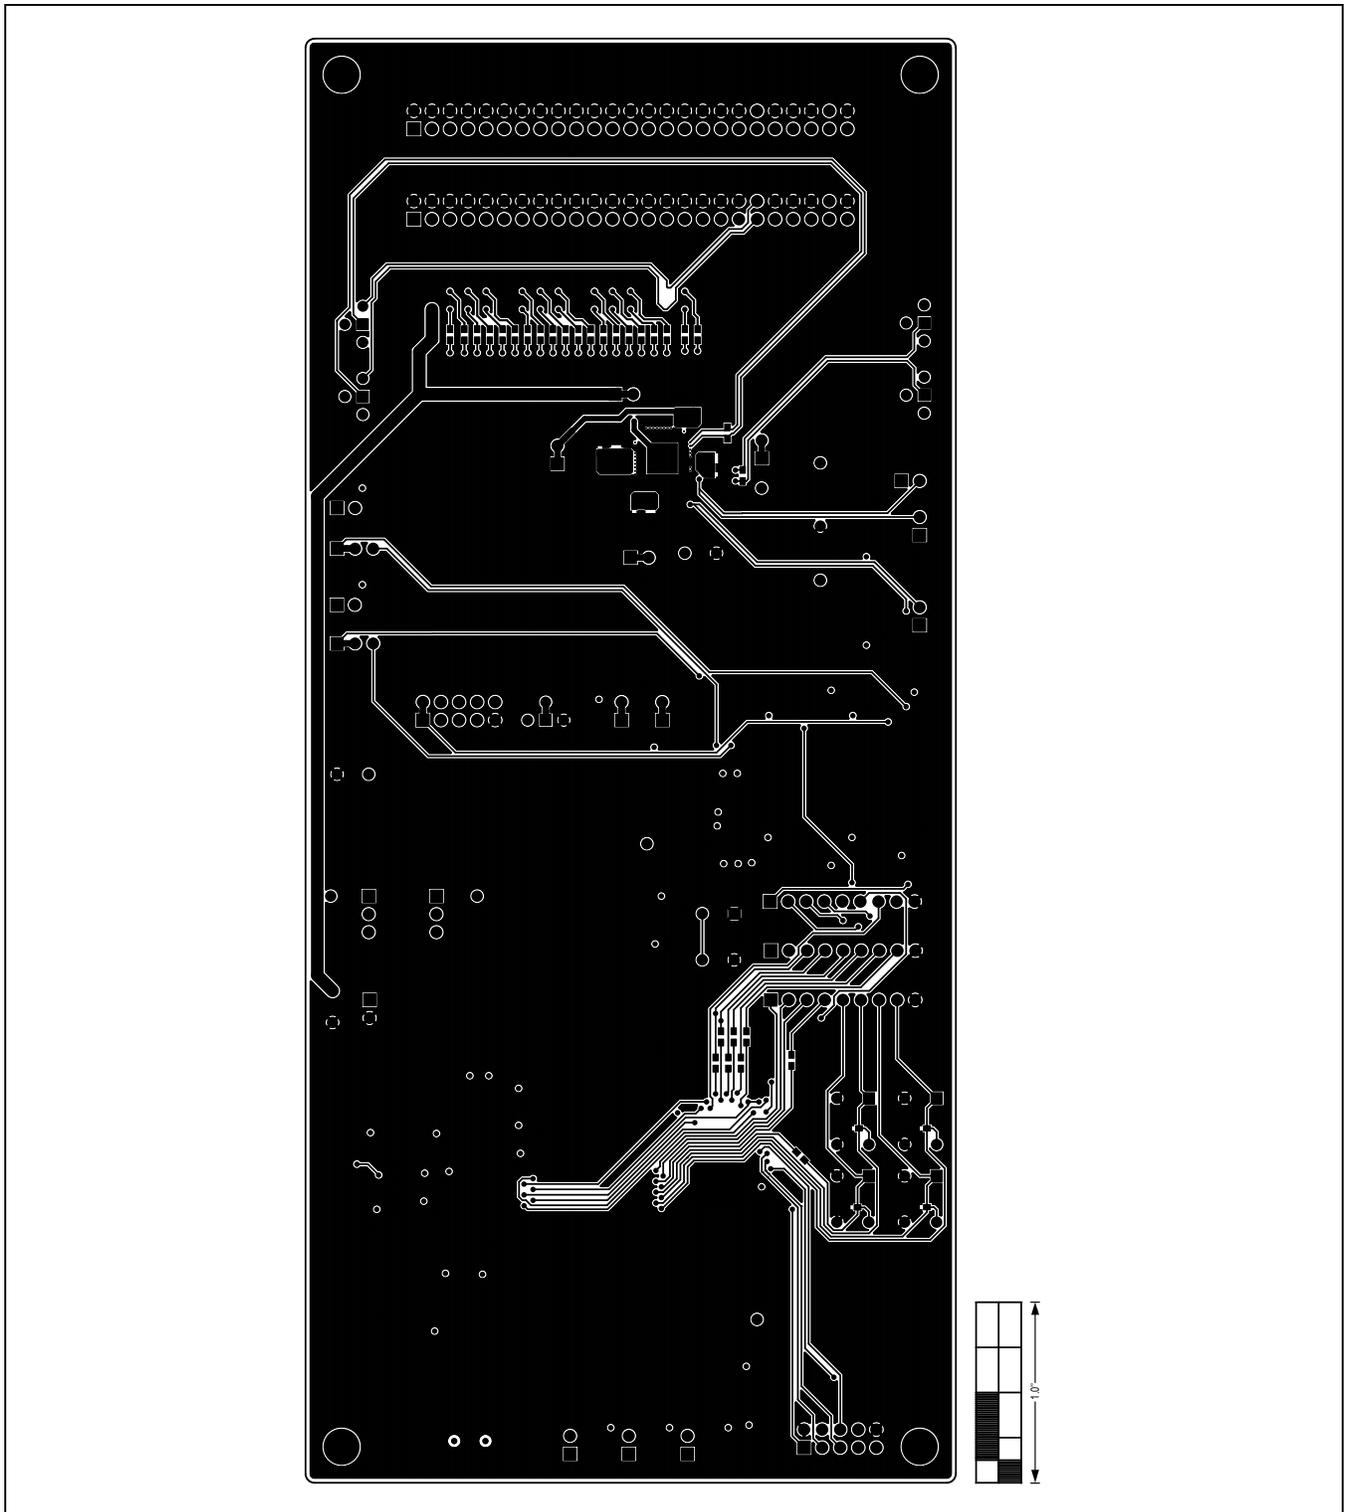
MAX11300 EV Kit PCB Layout—Solder Side
